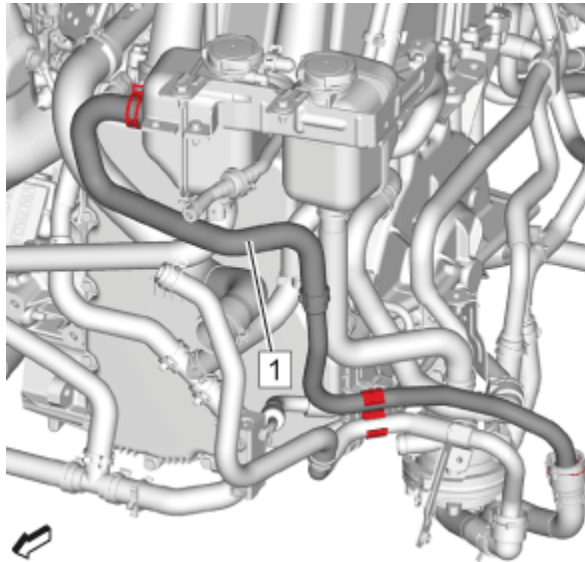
Drive Motor Battery Coolant Outlet Hose
